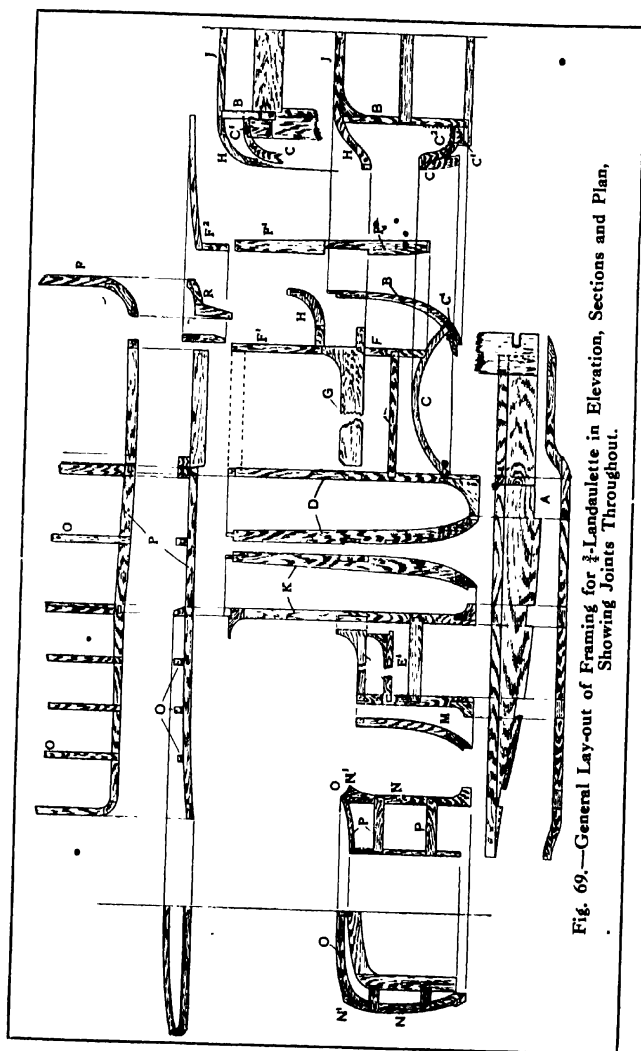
General Lay-out of Framing for 3-Landaulette in Elevation, Sections and Plan, Showing Joints Throughout.
